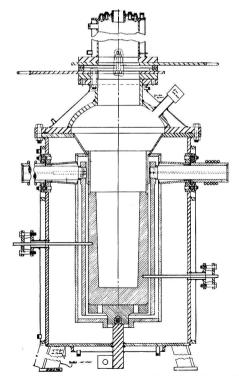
Assembly drawing of modified electrolytic cell with bumped head, gate valves, and cathode removal chamber in place.
